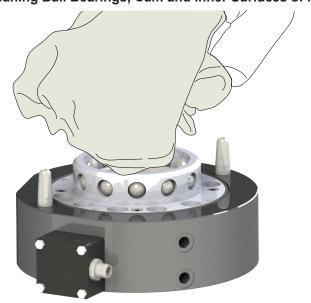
Cleaning Ball Bearings, Cam and Inner Surfaces of Male Coupling
